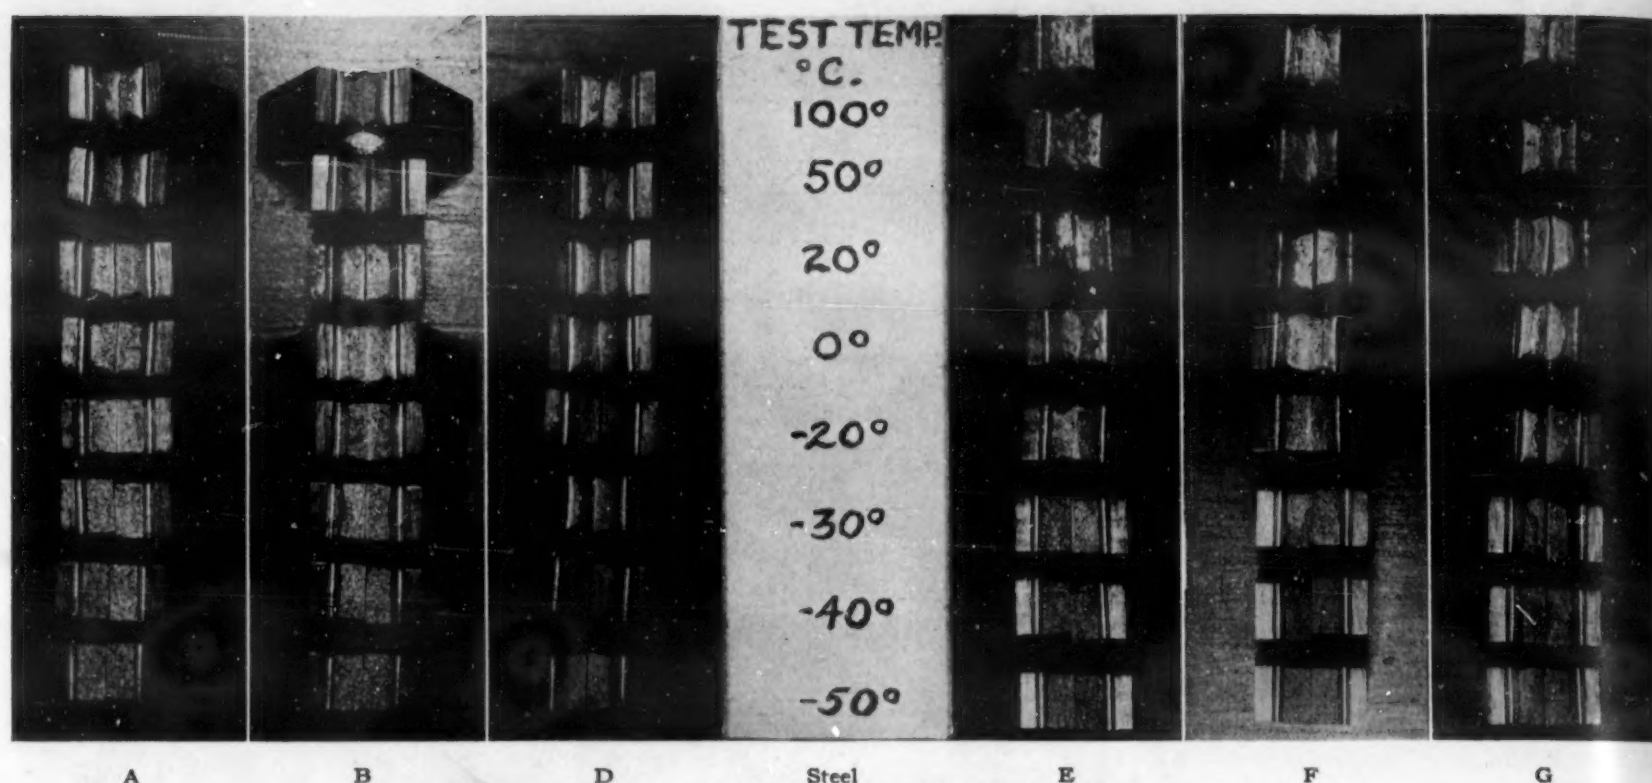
Photograph of Fractured Specimens, Normalized series.
